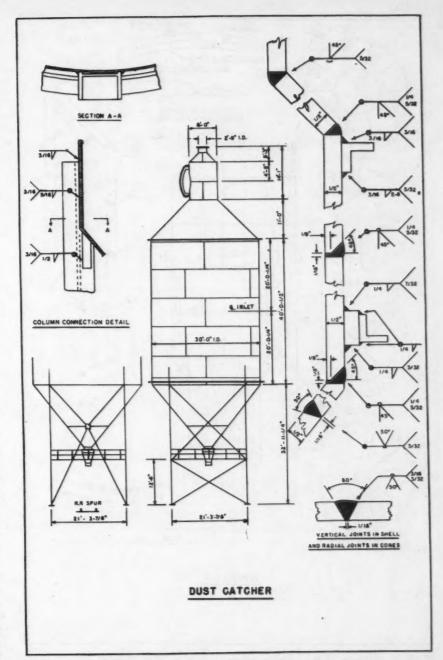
Details of the fabrication of the dust catcher. The smooth inside surfaces of the butt welded plate are an advantage in reducing abrasive action of flue gas dust.
